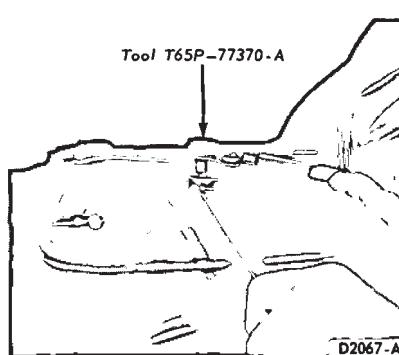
Adjusting Rear Band—Ford, Meteor, Fairlane and Montego
